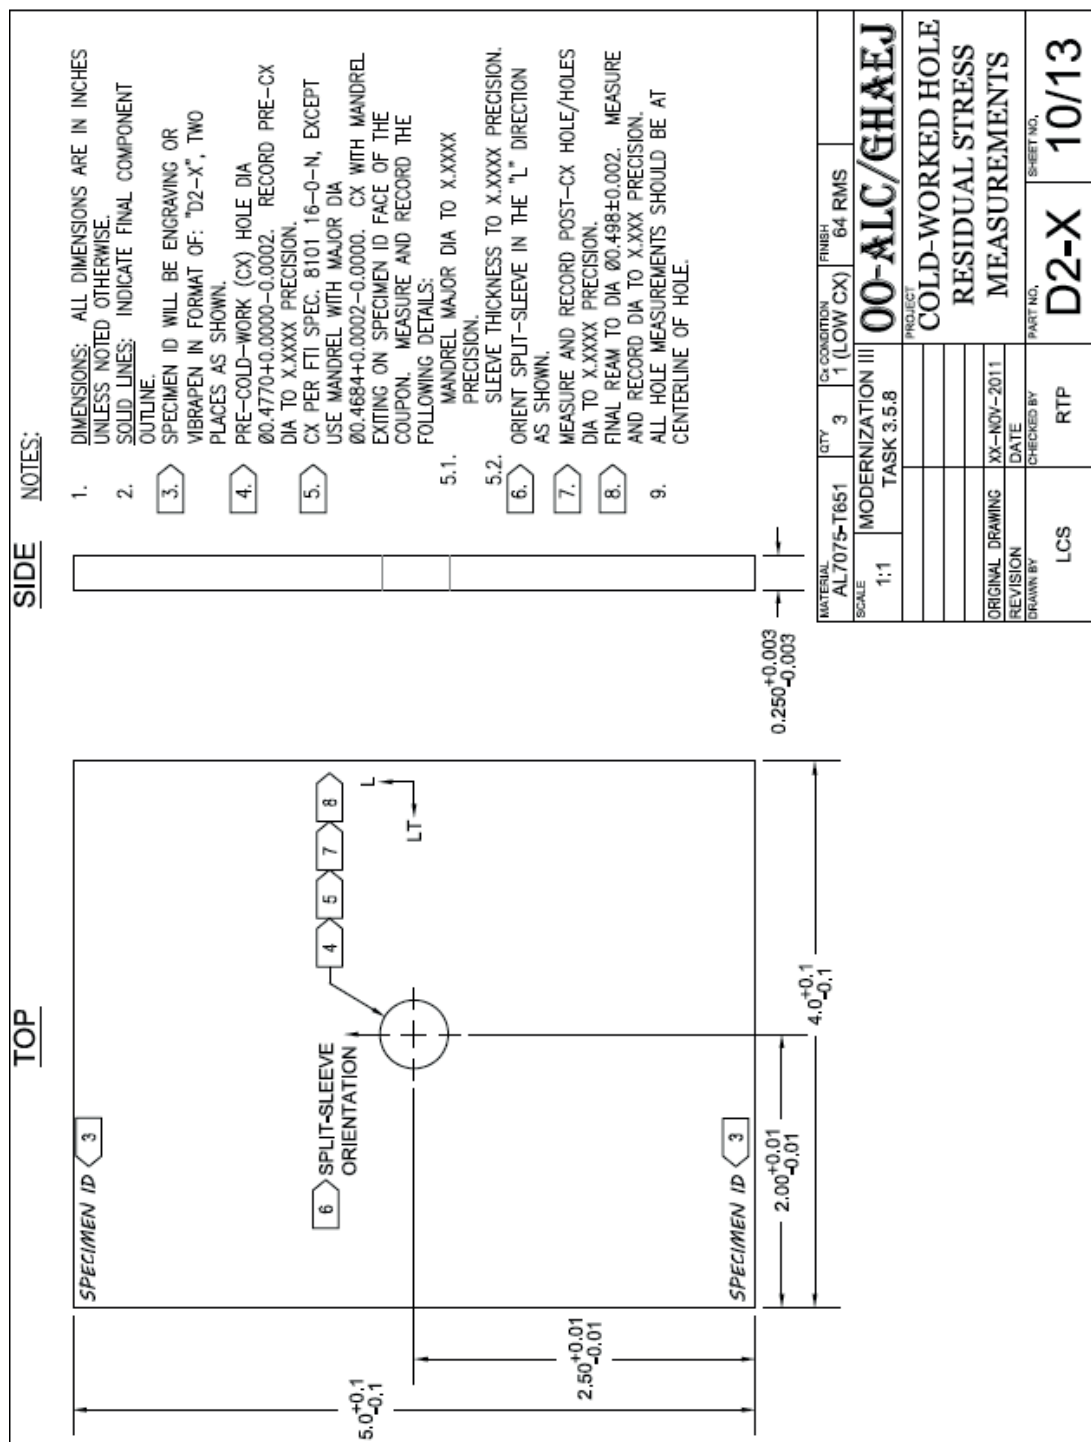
Drawing for 7075-T651 Residual Stress Coupons, Showing Process Steps in Notes.
